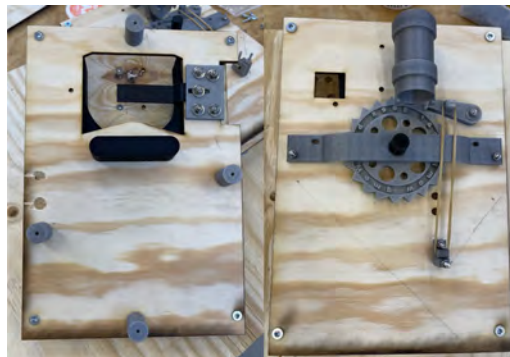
Final iteration of turning mechanism for Gacha Machine prototype: front panel (left) and back panel (right). Image taken by the authors.
